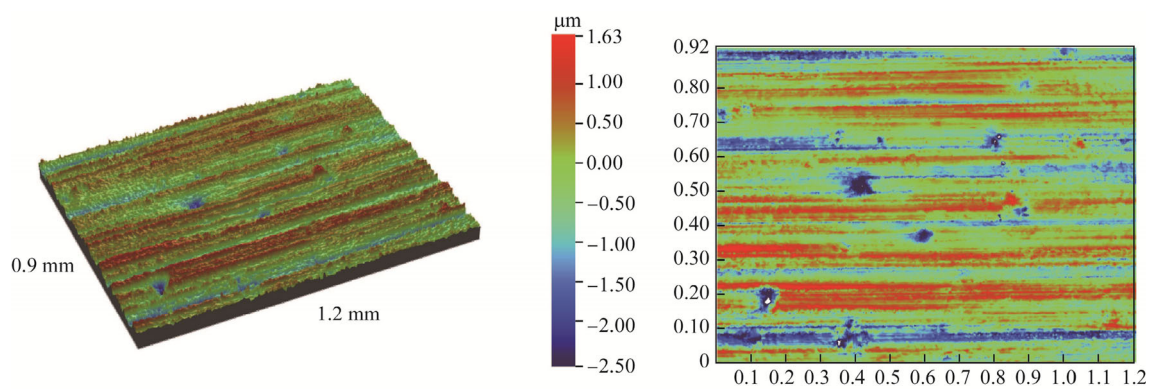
Surface textures of tungsten carbides after grinding with diamond wheel
